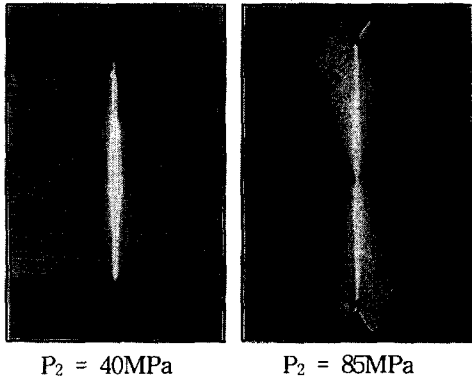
Macrostructure of friction welds (Mag. 1.6)
